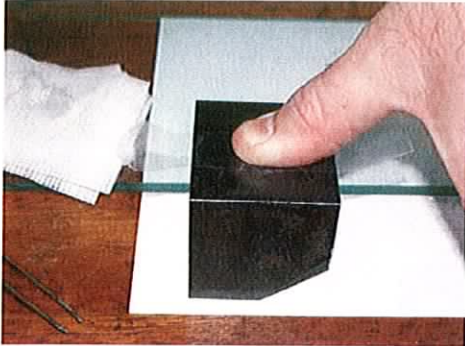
Deliver adhesive to adhesive tape / workpiece interface
